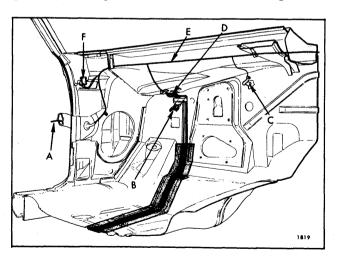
Front End Power Window Wiring - Chevrolet "B"
